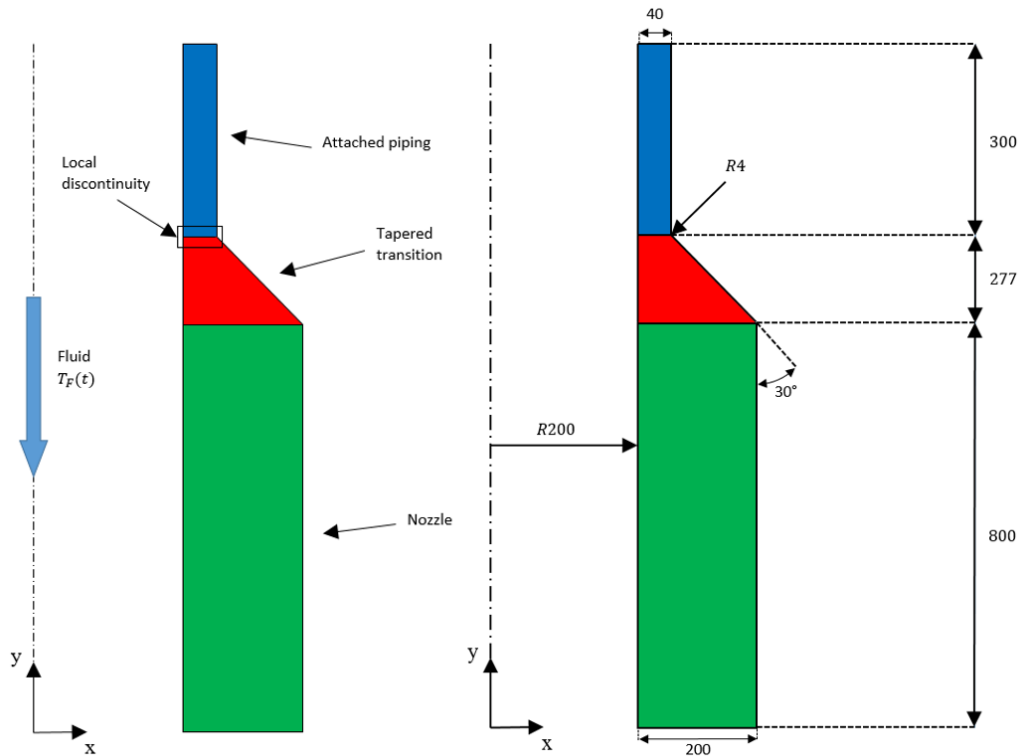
Description of tapered vessel nozzle geometry and major dimensions.
